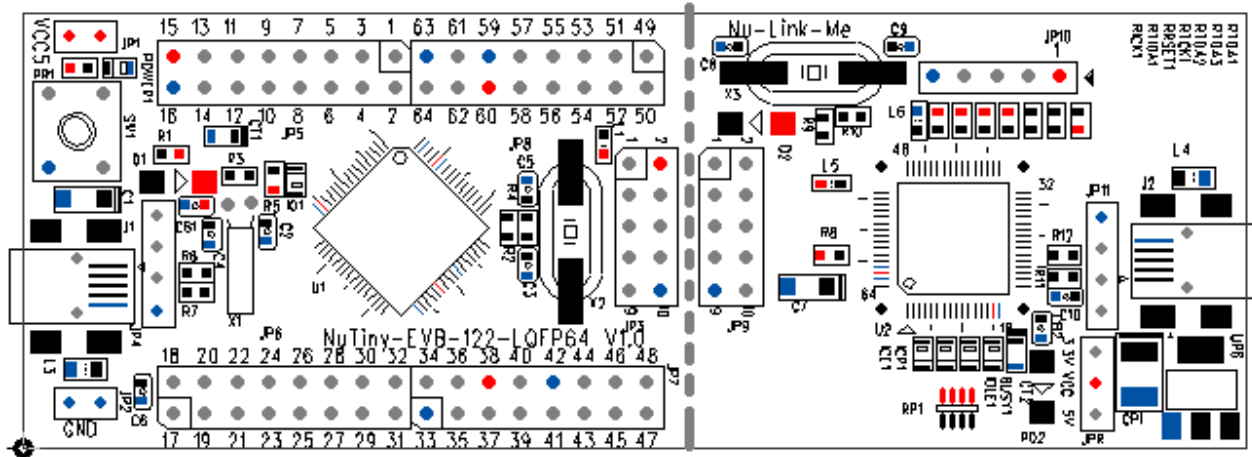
NuTiny-SDK-NUC122 PCB Placement
